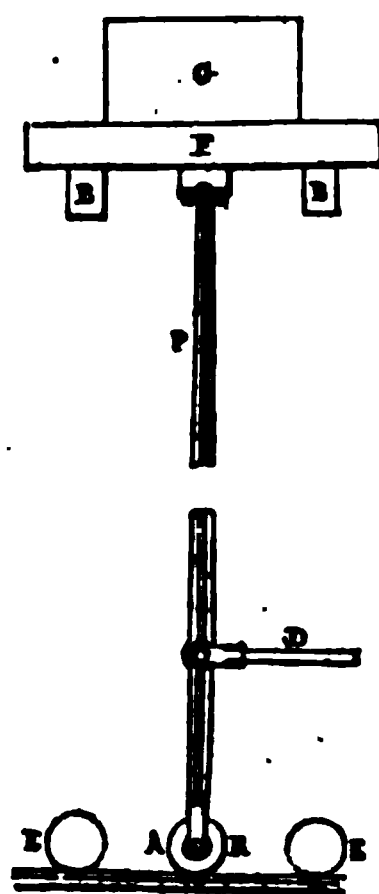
is a front view, and Fig. 63 a side view, of this machine. *F*, beam, movable at its hind end by a hinge *C* fixed in the wall, (Fig. 64), and maintained in a horizontal position at the other end by the supports *B B*.
